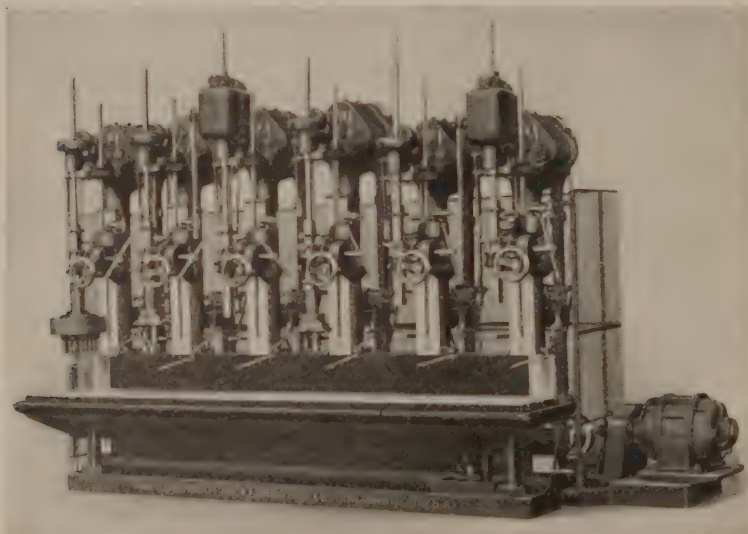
Gang drill with motor drive and cutting-lubricant system. Has counter-balanced head construction, each head with independent speeds and feeds. On the machine illustrated, two spindles have tapping attachments, and one, at the left, is shown with a multiple-spindle head. (*Courtesy of The Cincinnati-Bickford Tool Company.*)
